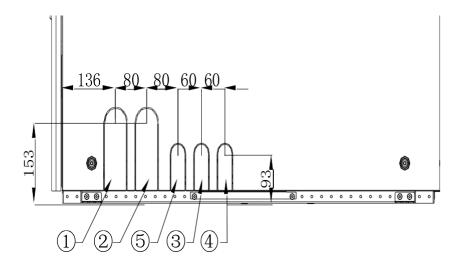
EACCR series lower air supply models side plate knockout hole size
